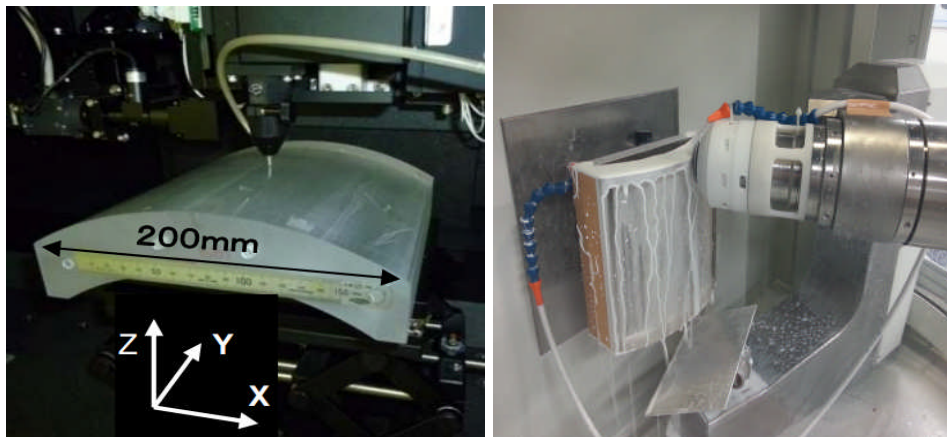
Mandrel being measured inside UA3P (left), and polished inside Zeeko CNC machine (right).
